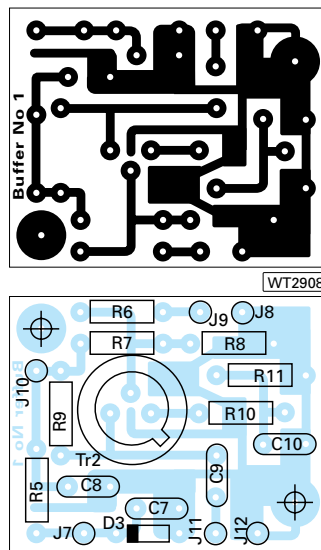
A p.c.b. for Buffer, this is now available separately (or together with) with the v.f.o. p.c.b. and parts. The layout and component identification illustrations are shown here (see text).
